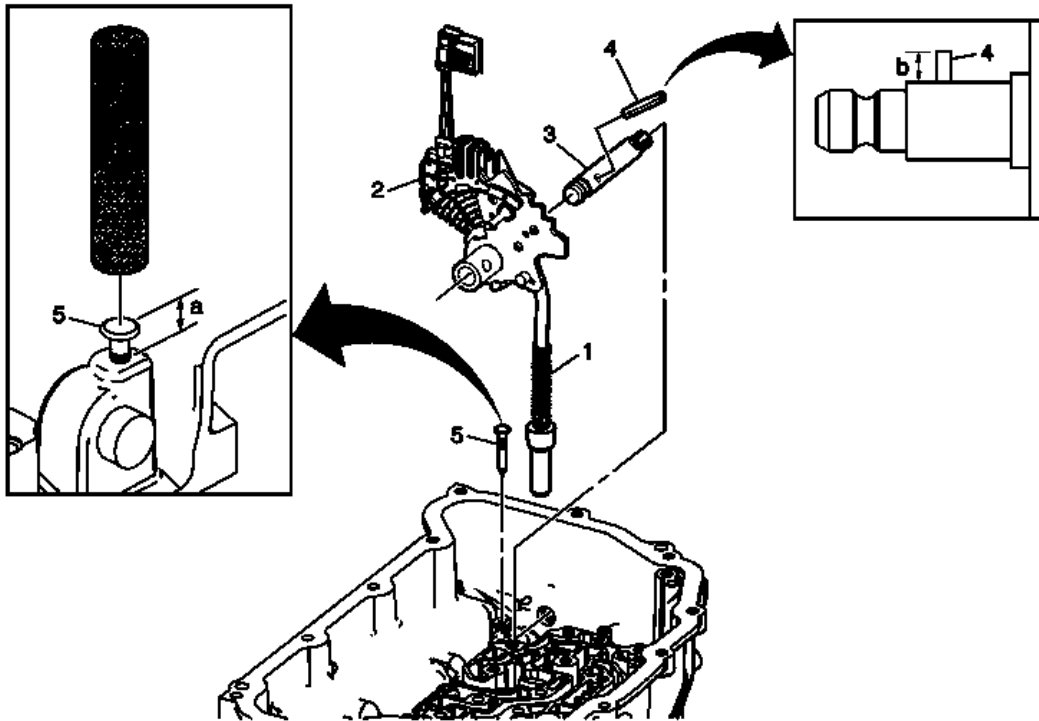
Identifying Manual Shift Detent Lever with Shaft Position Switch Assembly & Park Pawl Actuator
